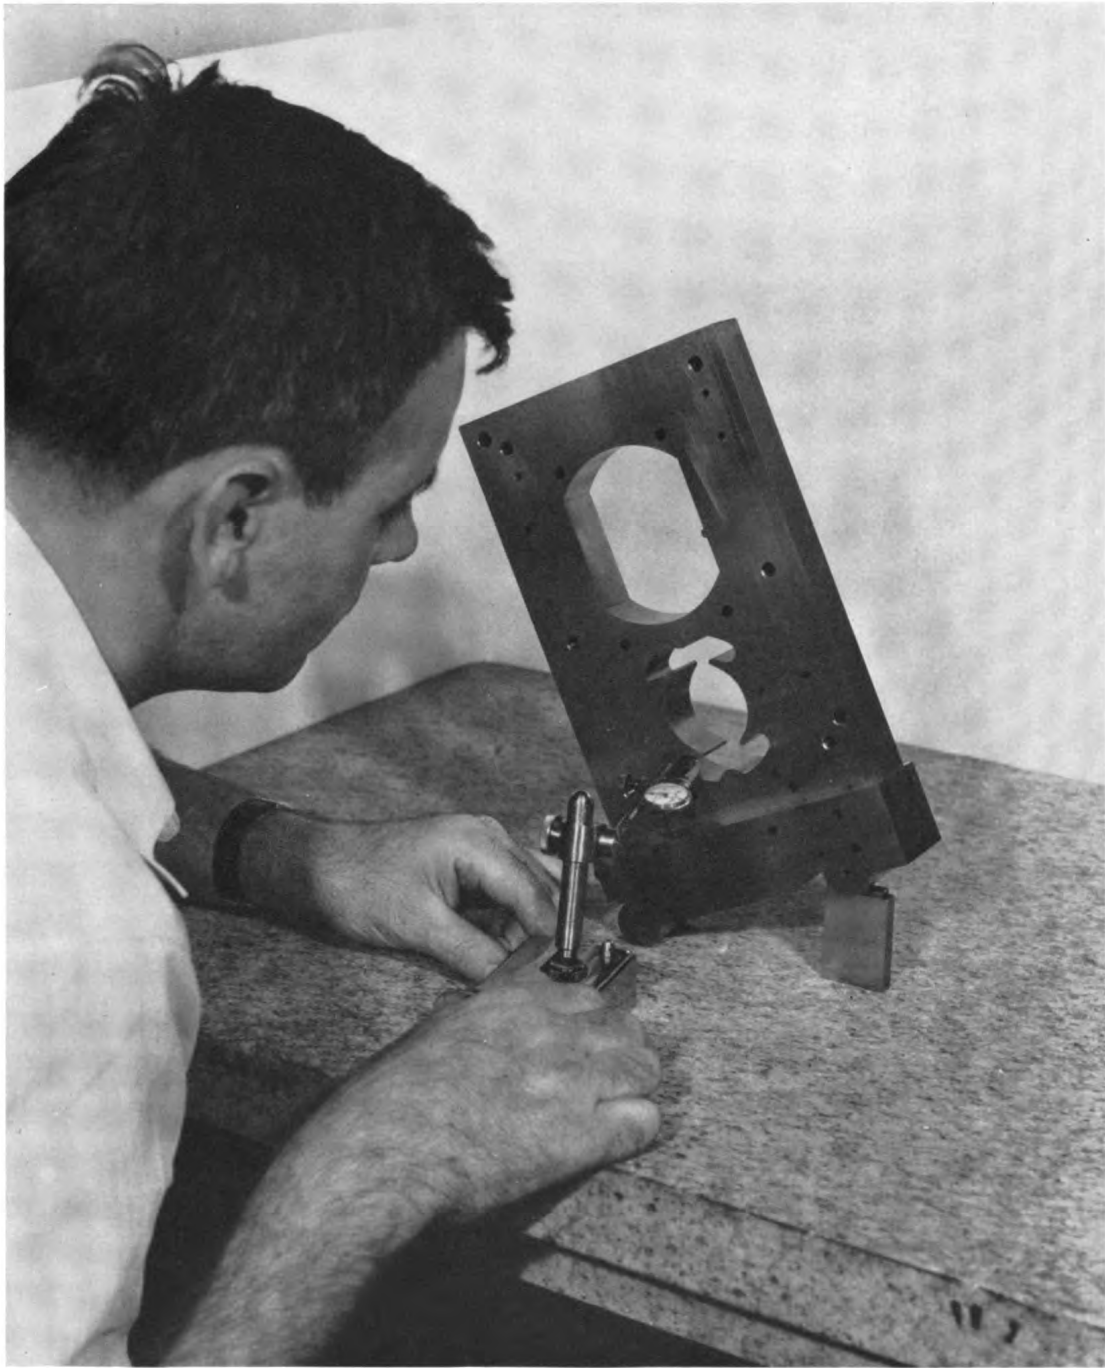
Surface plate inspection of hole location involves predetermination of squareness of edges to each other and to the face of the workpiece.
